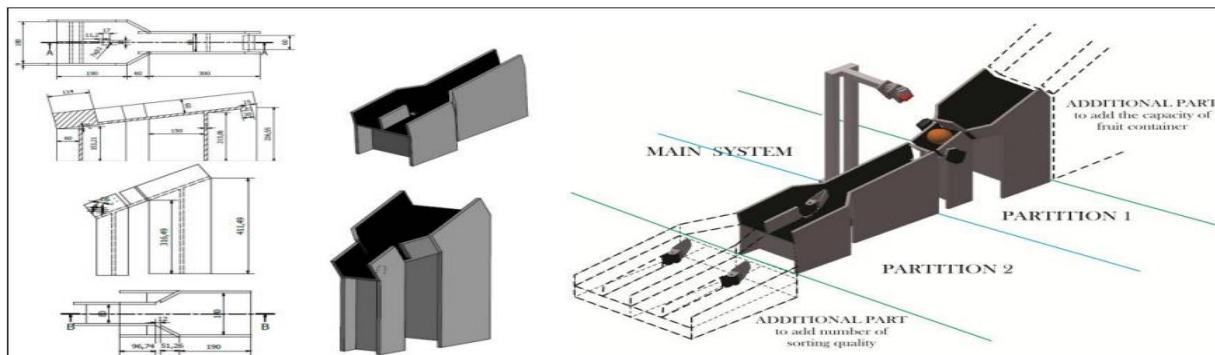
1: Mechanical Design of Portable Smart Sorting and Grading Machine for Fruit
